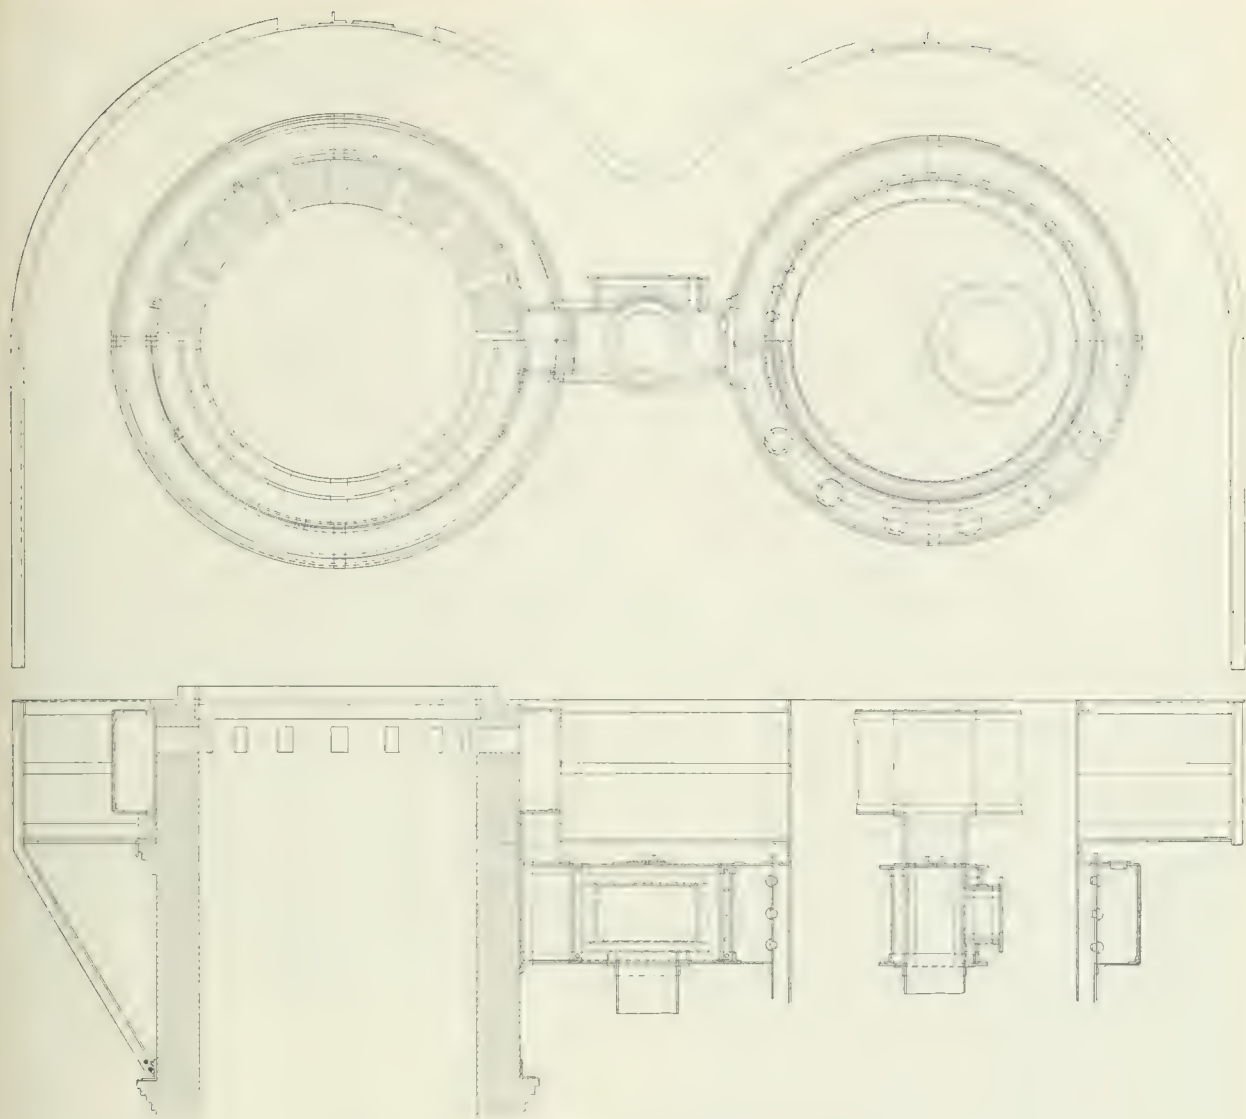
Details of the Dipping Tank and the Bustle Pipe.
